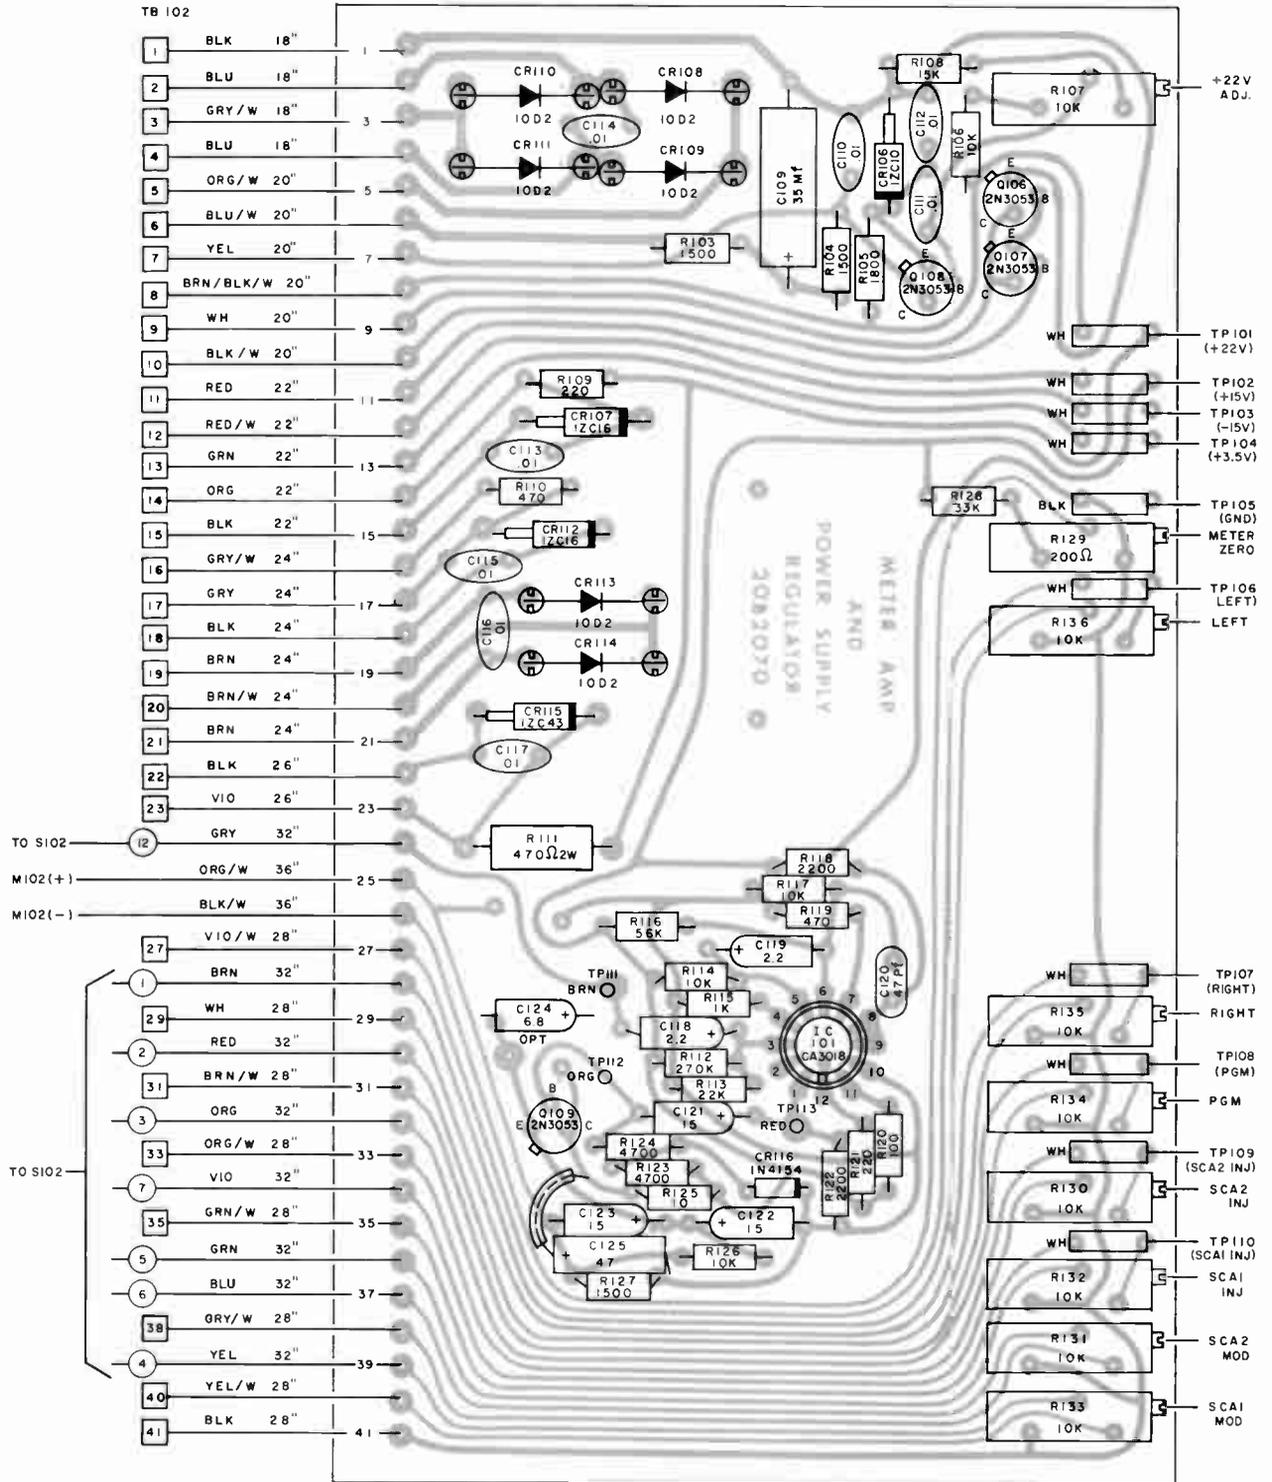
Main Frame Metering Amplifier Board, Parts Overlay, Bottom
